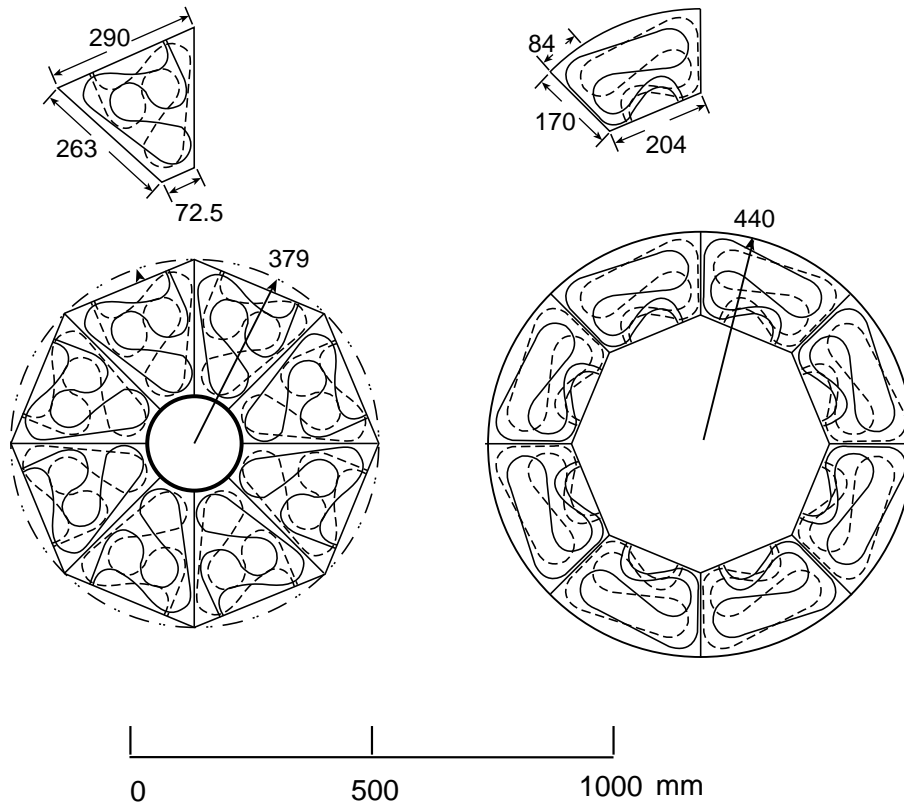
MIP Plug Sector arrangement showing inner and outer layers
